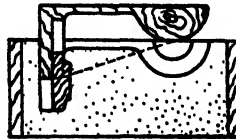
Drawing Pattern, with Loose Piece Left in Mold.
